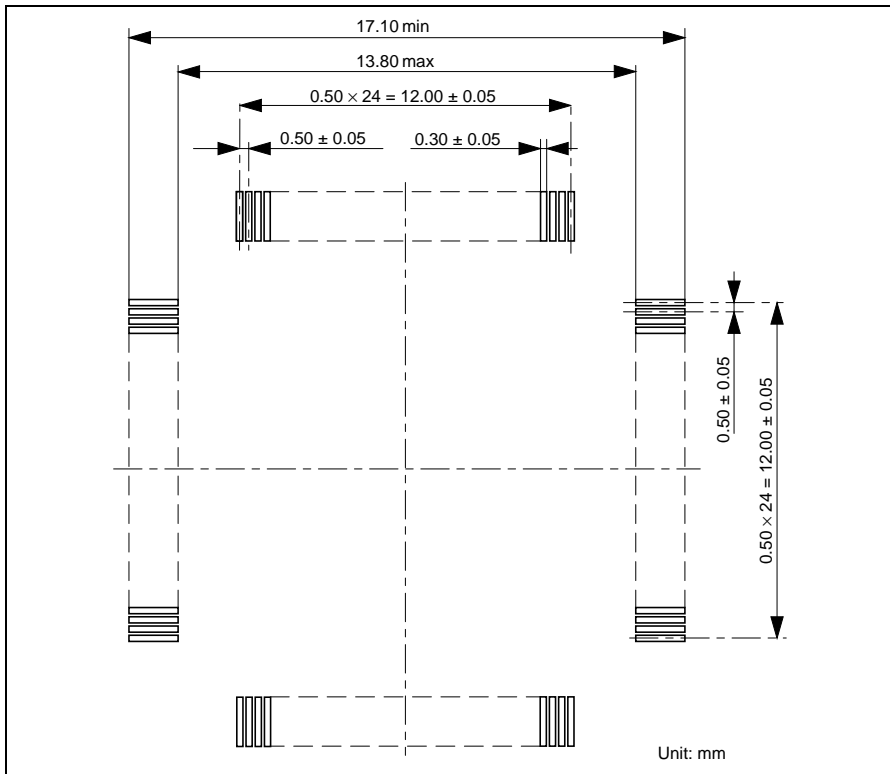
Recommended Mount Pad Dimensions of the User System IC Socket
